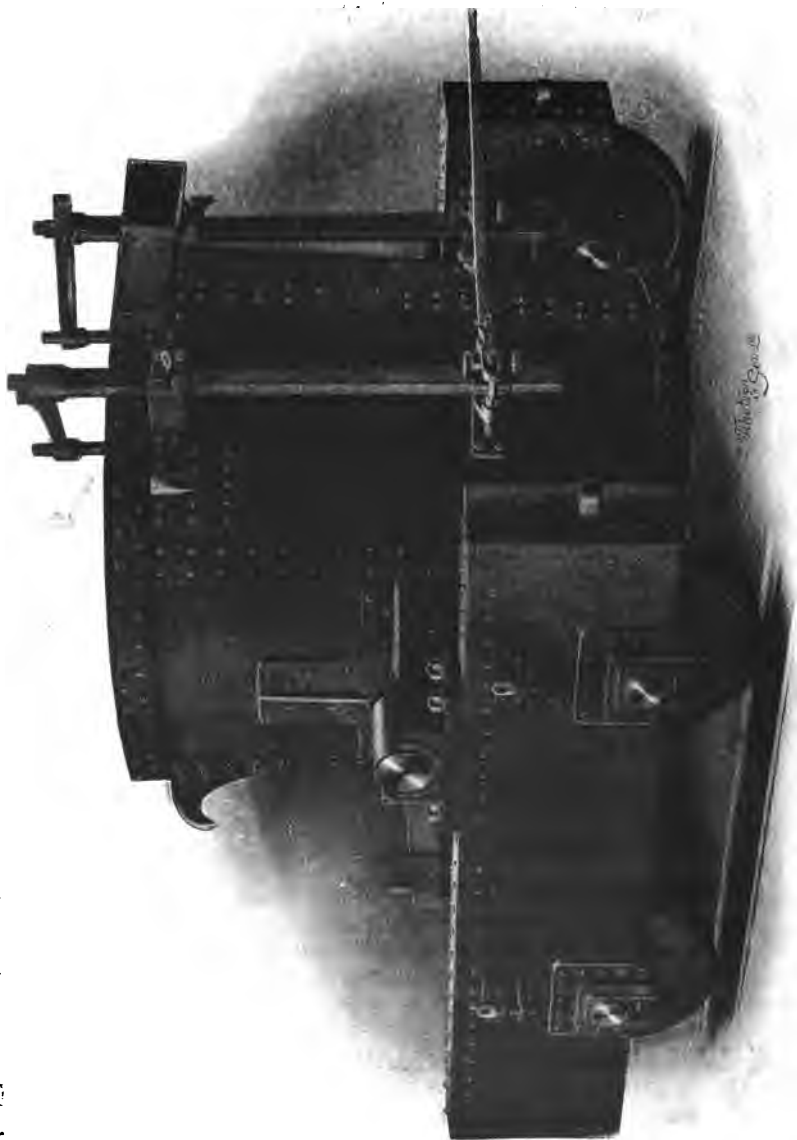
Large Steel Ladle with Double Teeming Arrangement.
